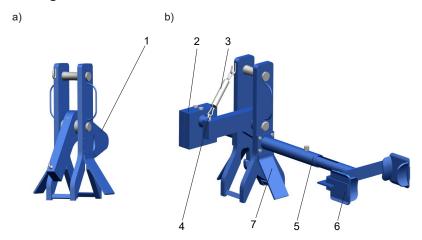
Lifting accessory a) Lowering the pump set b) Pulling out the pump set
